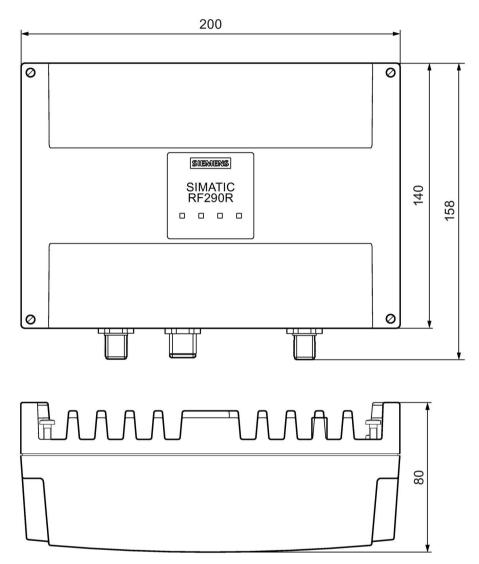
Dimensional drawing RF290R (dimensions in mm)
